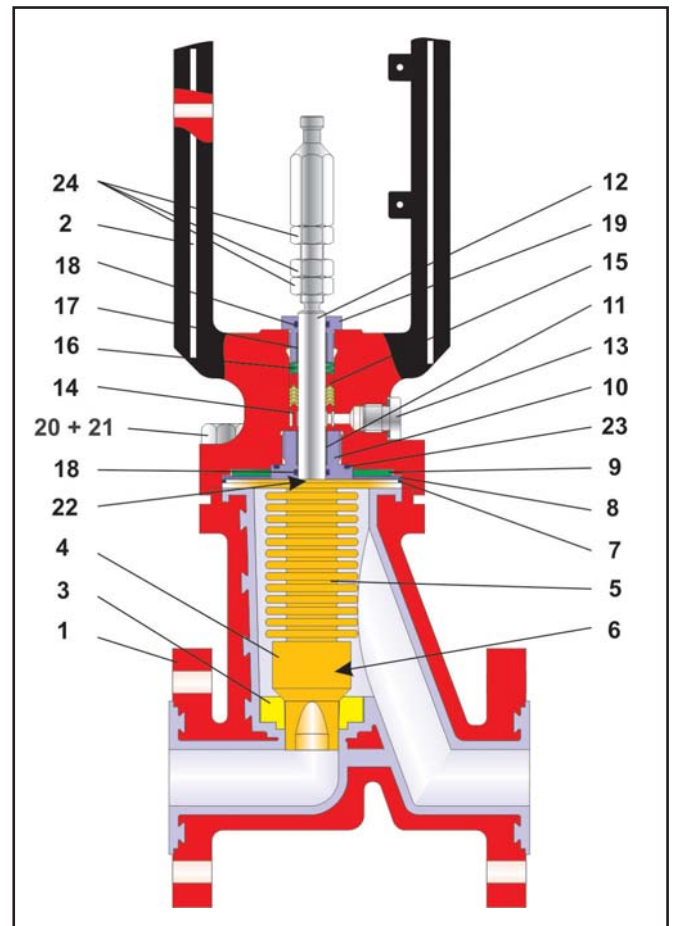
Sectional view of control valve Series 1b => Parts list, see table 1 on page 3
